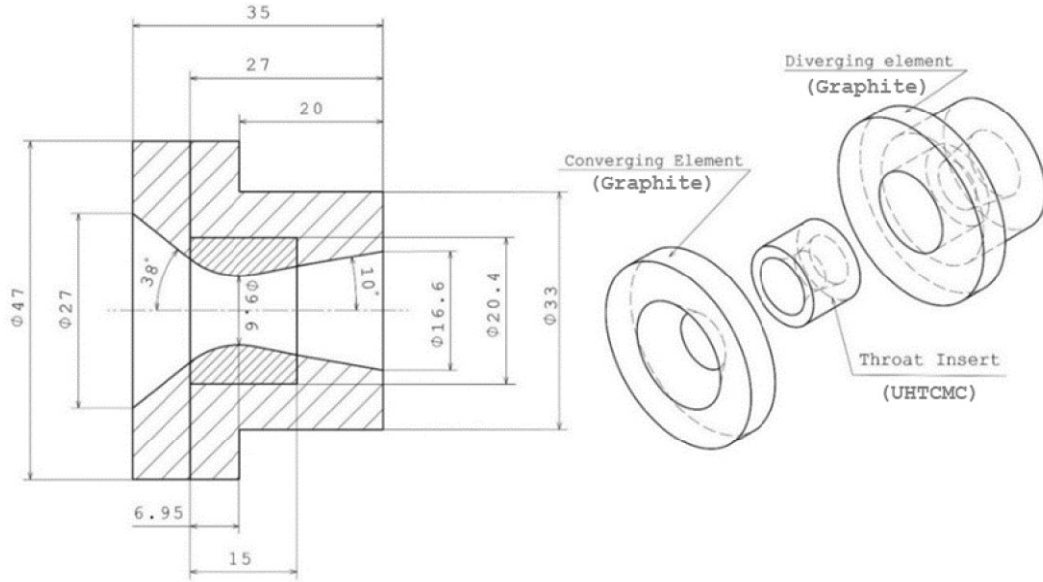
Design of subscale segmented nozzle with UHTCMC nozzle throat insert for hybrid rocket engine. Dimensions are in mm.
